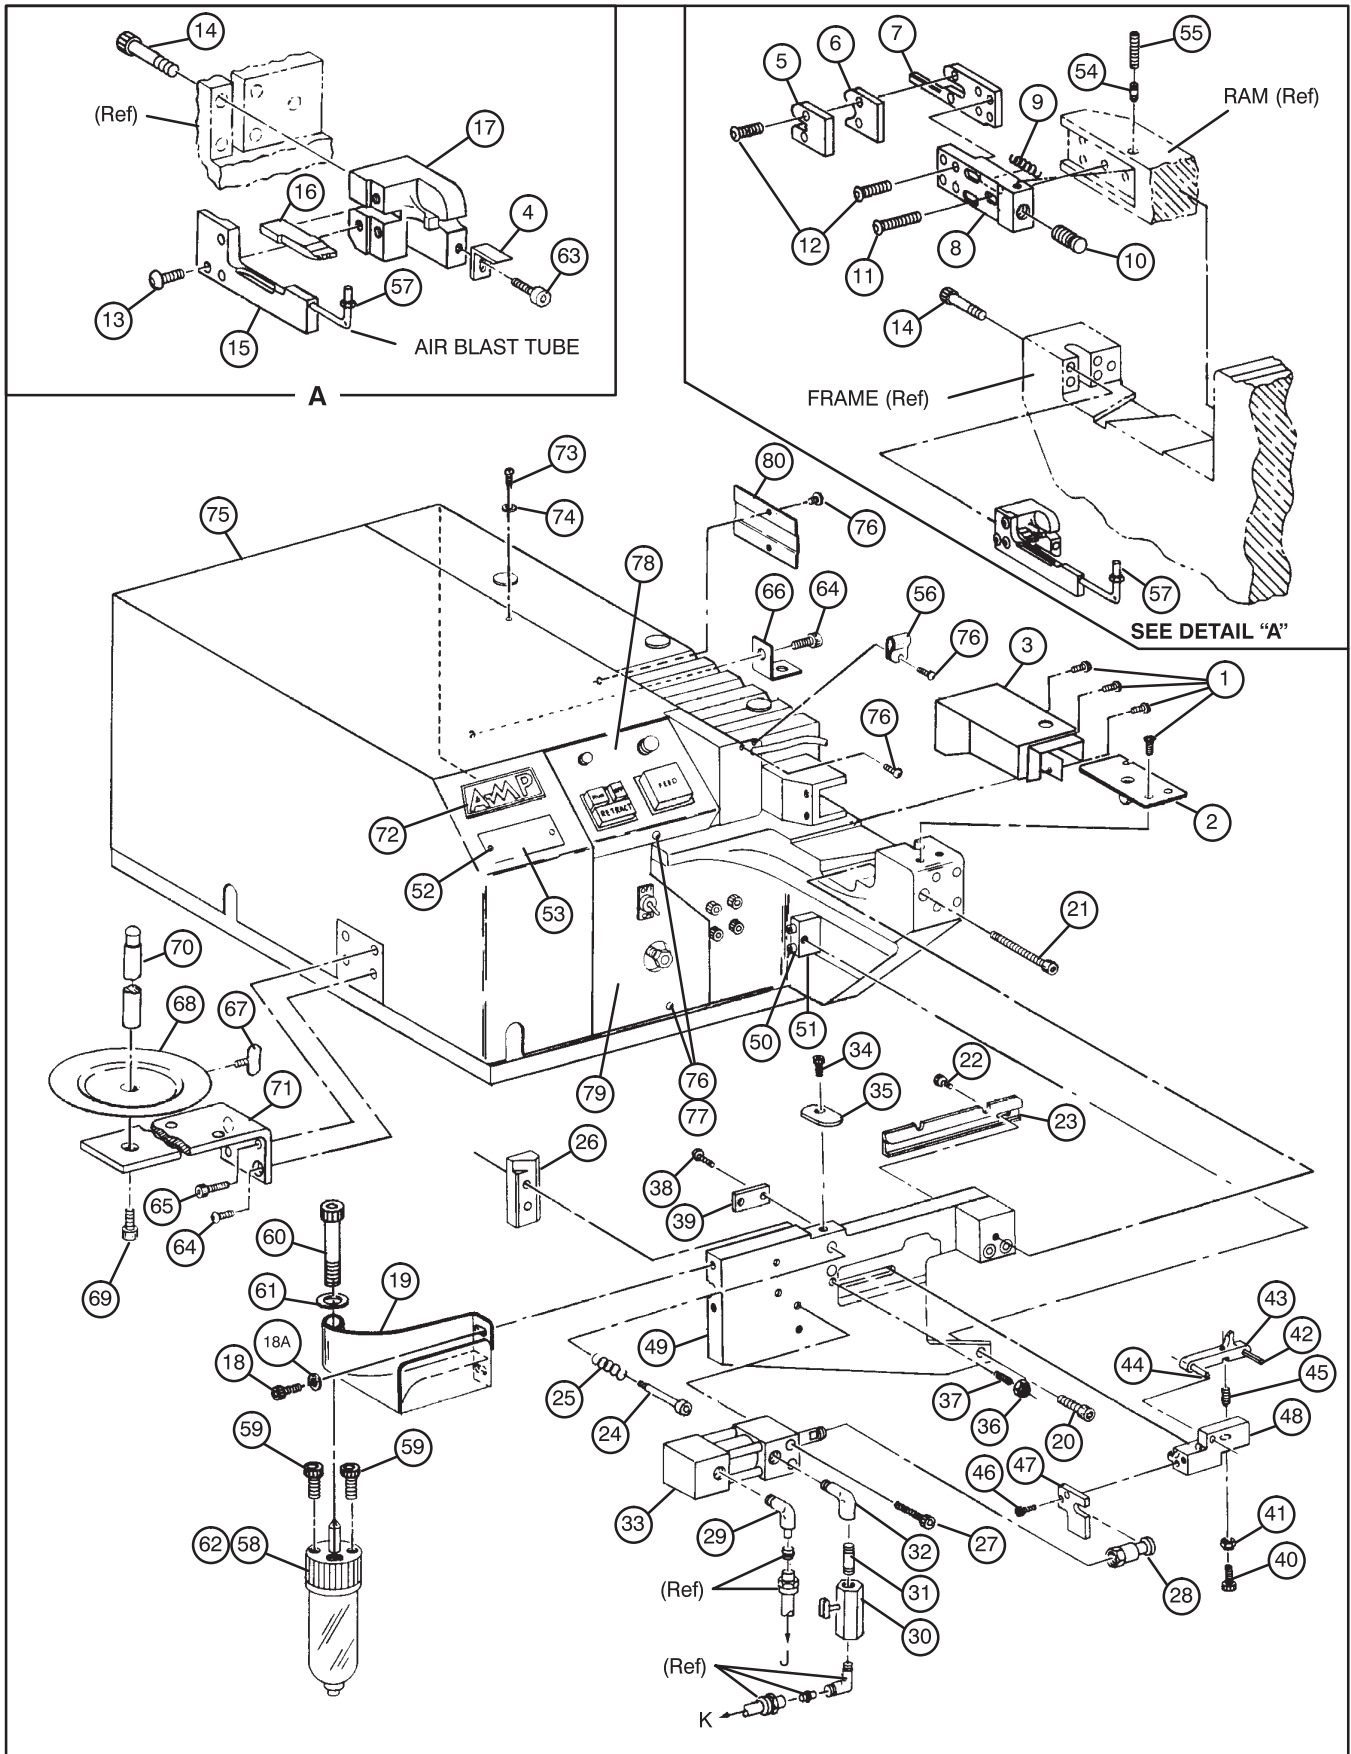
Exploded View, Horizontal Terminating Machine, Model 4 (Sheet 3 of 3)
